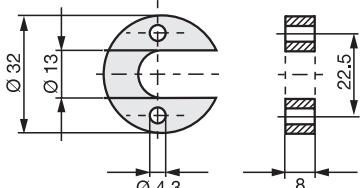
Installation dimensions of BTL-P-1013-4S magnet
